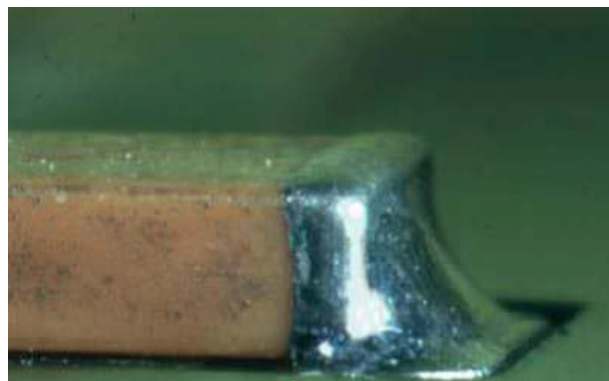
Acceptable, maximum solder (see also Table 11-1)
